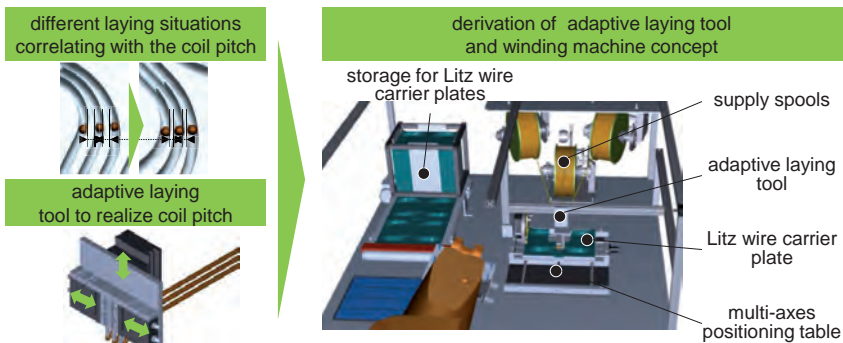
Winding approach for “multi-Litz wire multi-pole” pad designs.
